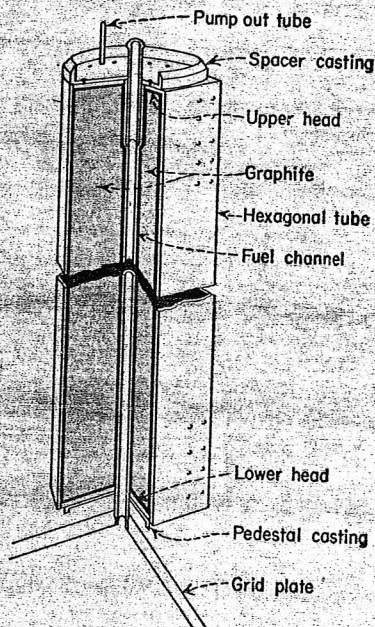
Type-A can assembly uses a graphite stringer, 0.035-in. sheet Zr for hexagonal tube, 0.10-in. Zr plate for upper and lower heads, 2.875-in.-o.d. \times 0.035-in.-thick Zr tube for fuel channel, ½-in. o.d. \times 0.035-in.-thick Zr for pump-out tube used to charge assembly with pressurized helium. Each can is supported on a grid plate by a type-304 stainless-steel pedestal casting, the flange of which is fastened to the lower head of can with 10 studs welded to can head. Upper ends of cans are spaced laterally by similar castings. Without pumpout tube, over-all height of unit is 120.32 in.; outside width across flats is 10.872 in. Unit weighs 760 lb, of which Zr is 49 lb. Stainless-steel sheet 0.031 in. thick is used for the hex walls of the outer reflector units
